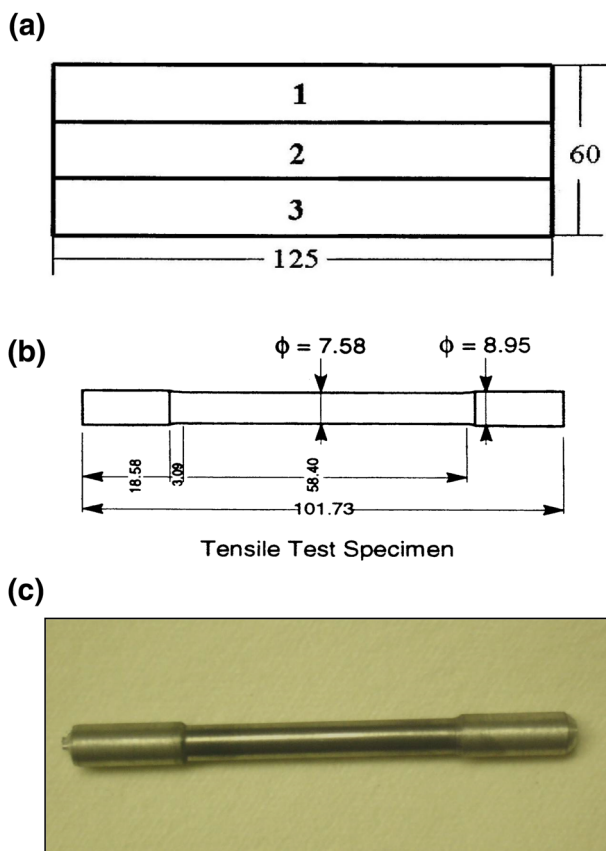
(a) Blank sectioning scheme for preparing tensile test specimens; (b) tensile test specimen dimensions (in mm); (c) actual tensile test specimen.
